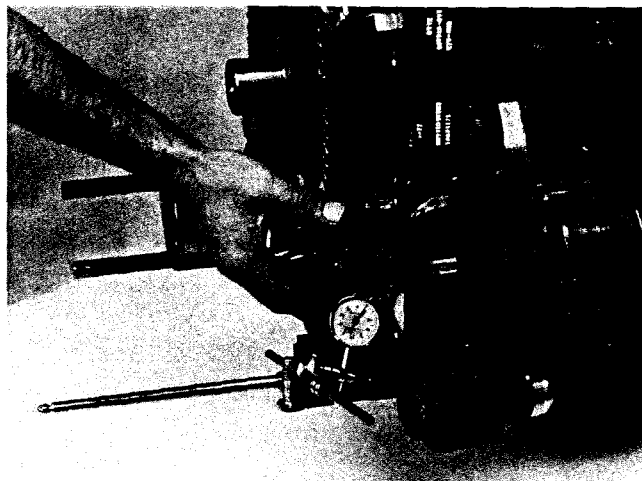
, (N114264). Checking lubricating oil pump gear backlash
